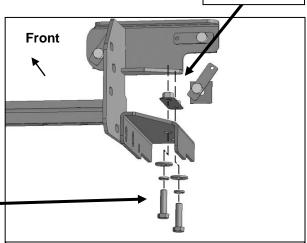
Models without tow hooks, insert Double Nut Plate into open end of frame (arrow). Reuse the factory hardware to attach the air dam to the bottom of the Winch Tray
